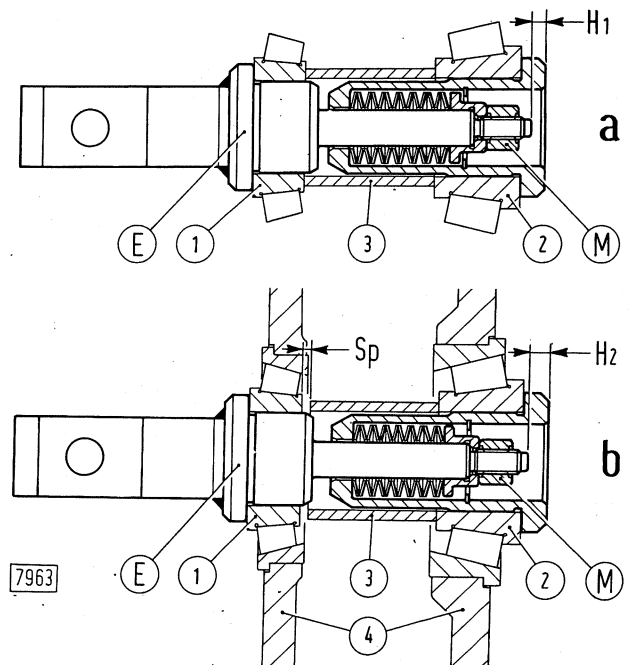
Finding the thickness of the shim pack (S_p , Fig. III/6) for the adjustment of the pinion shaft tapered roller bearings.
